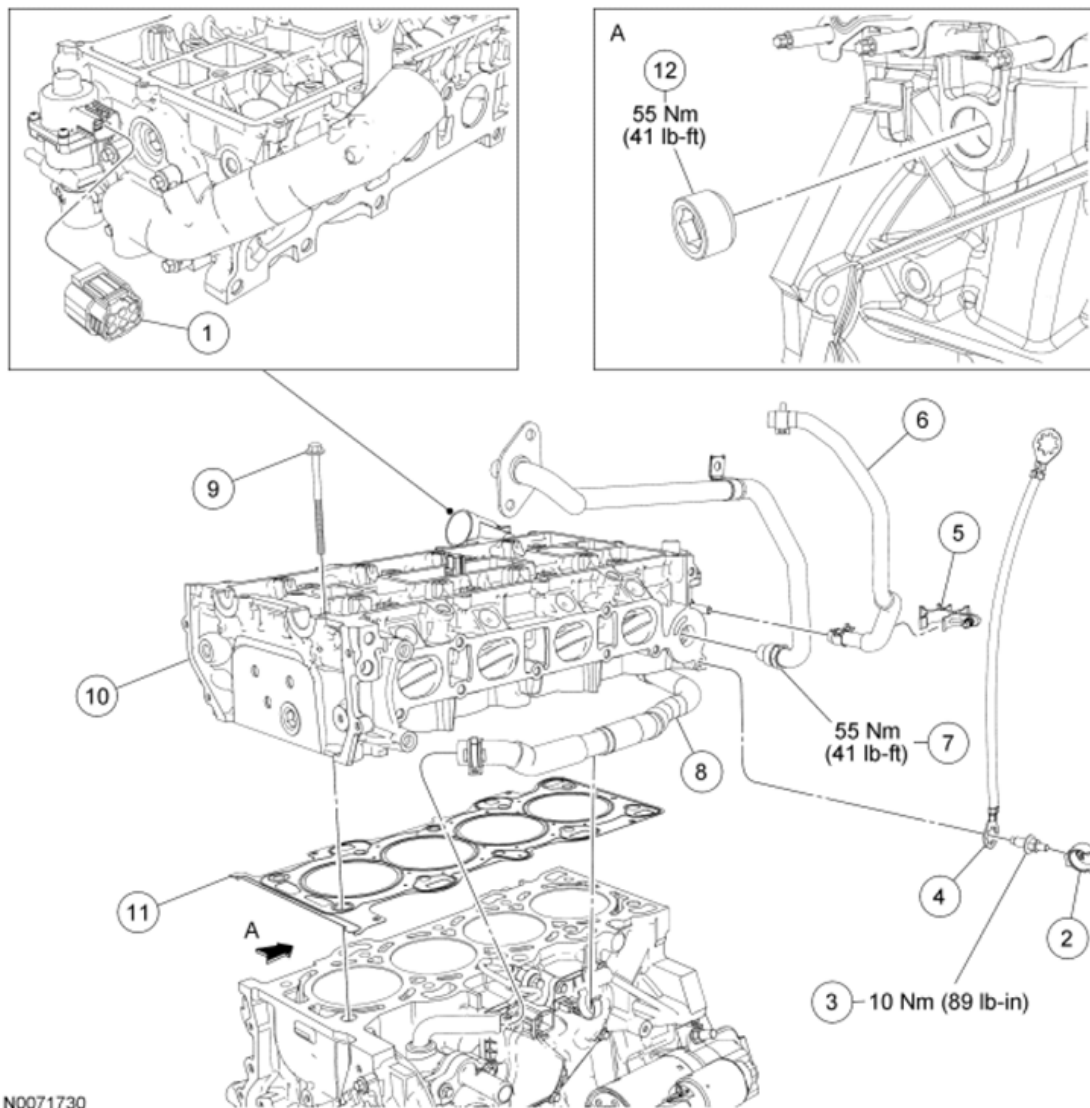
Identifying Cylinder Head Components With Torque Specifications
